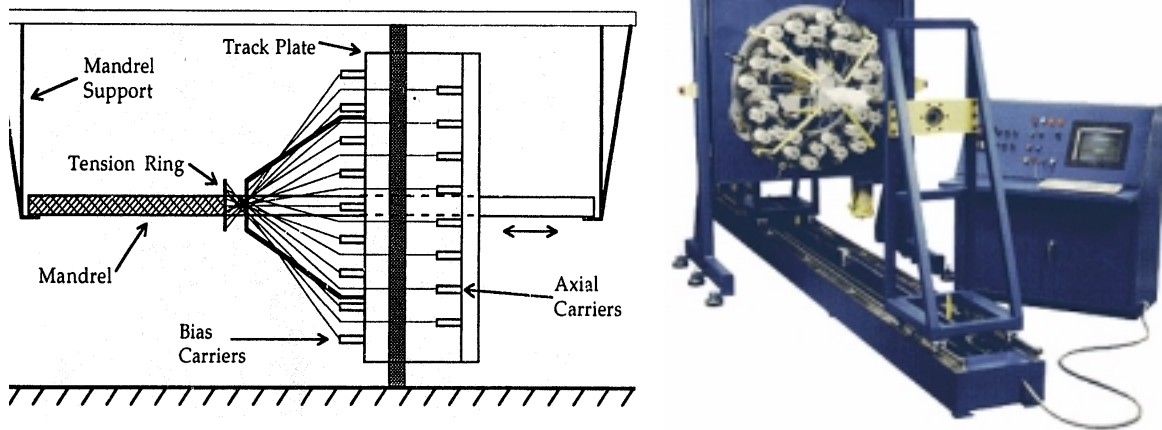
Schematic view and photo of a cylindrical mandrel [5]
